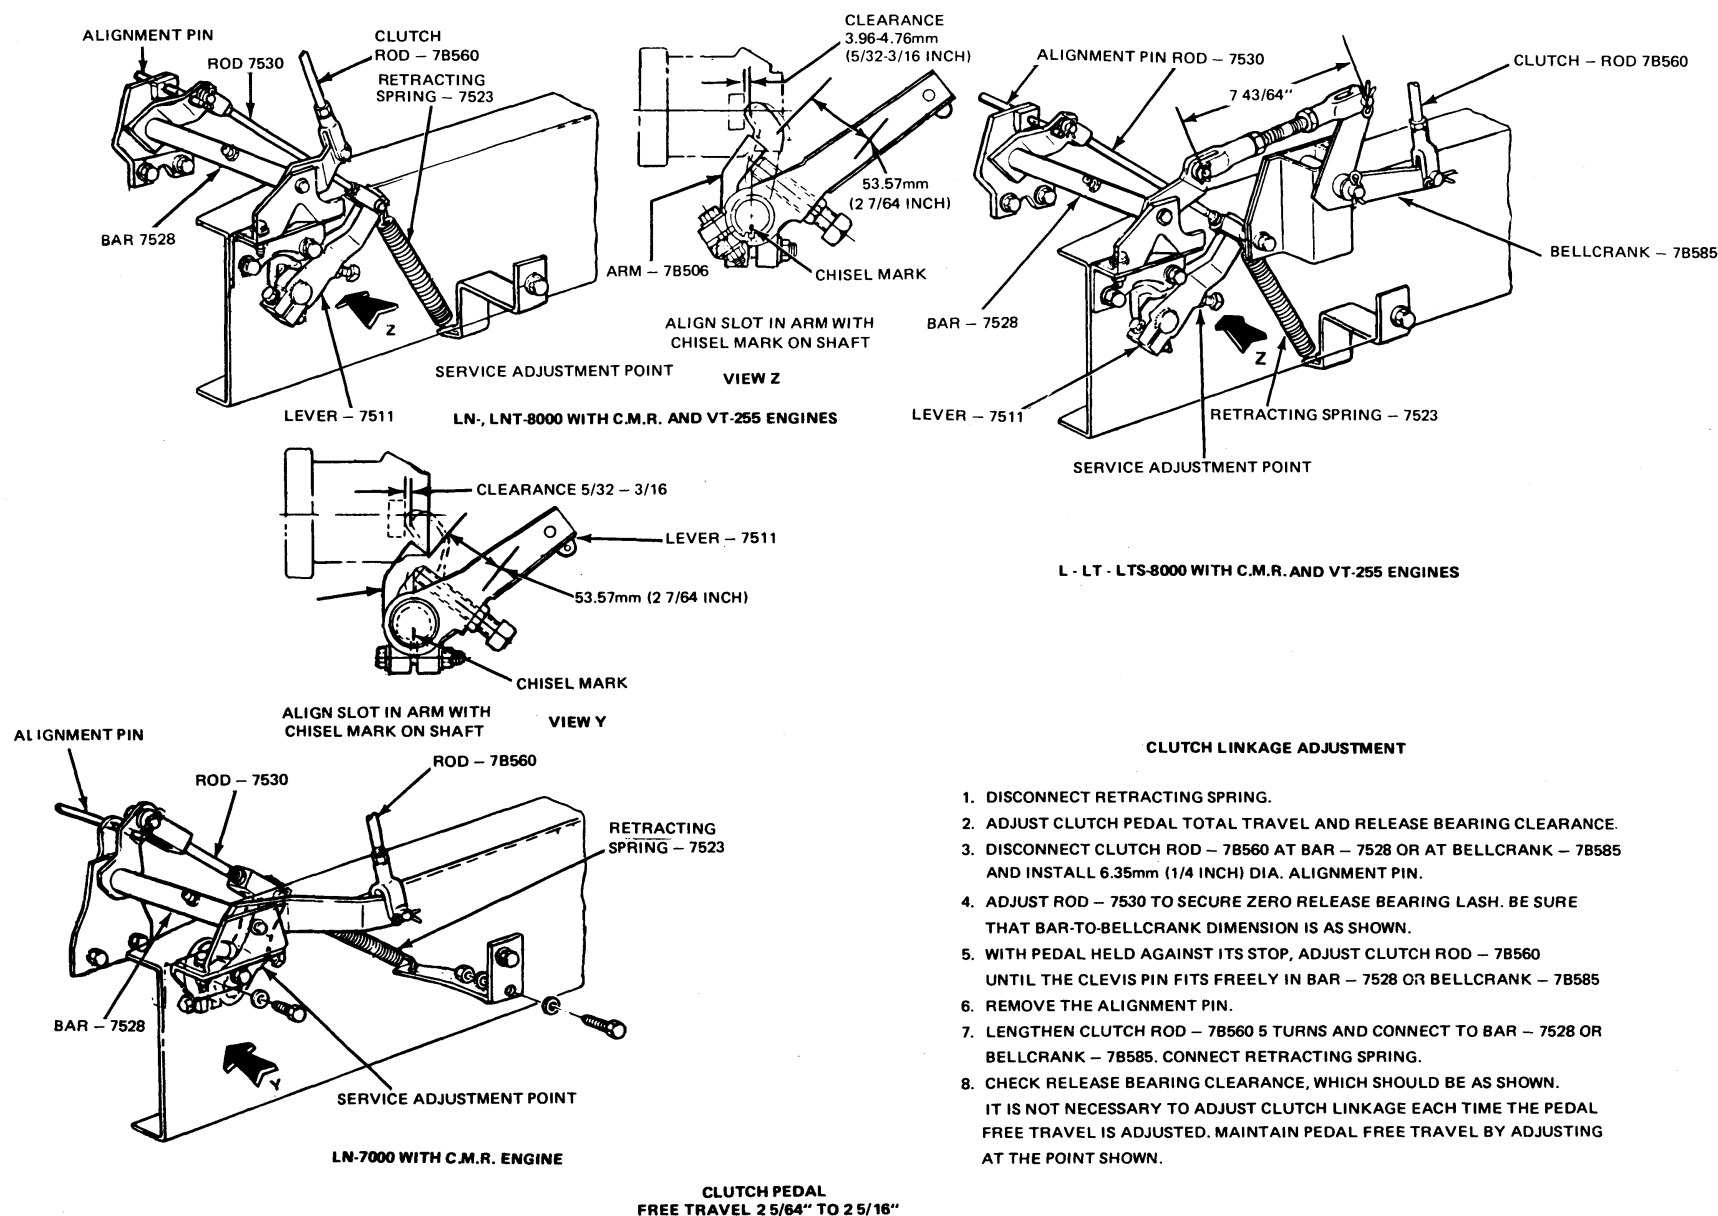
Clutch and Linkage—LN-7000, L-, LN-, LTS-, LT-, LNT-, -8000 with Caterpillar V-8 and Cummins VT-225 Diesel Engines
